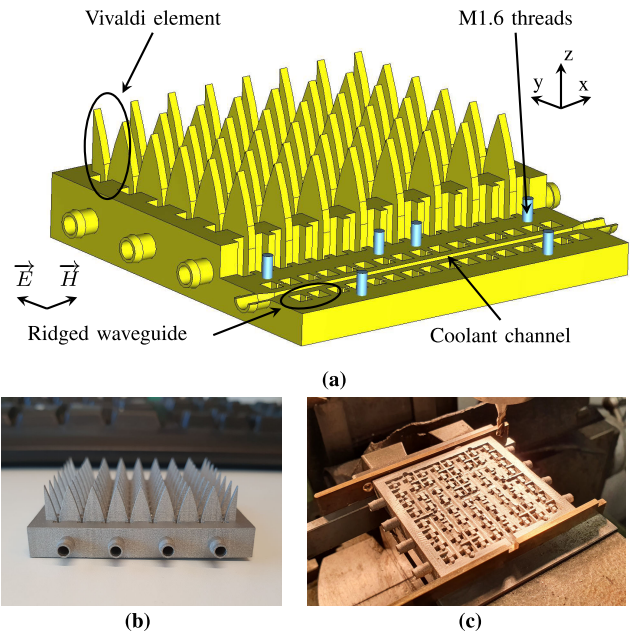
(a) Three-dimensional antenna-array model with a cutout to show the coolant channel and M1.6 threads. (b) Side and (c) bottom views of the manufactured prototype.
